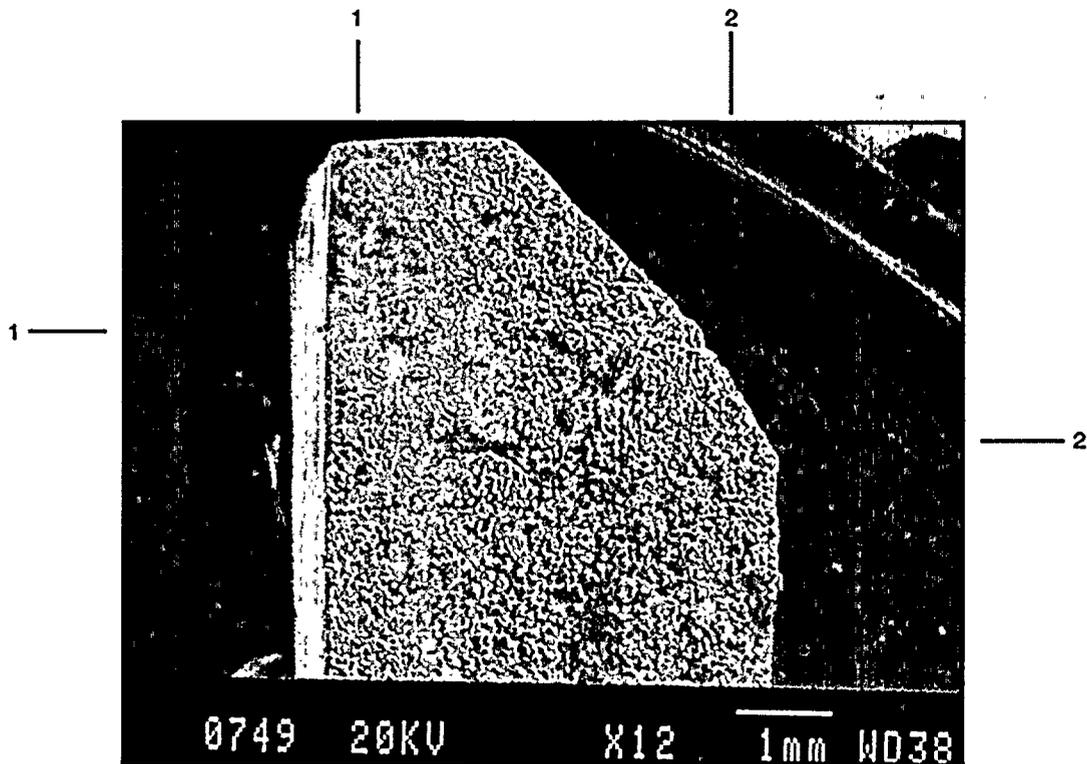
SEM view (12X) of the fracture face of 90 degree contact wedge latch. This low magnification macroscopic view shows secondary cracking associated with the primary fracture. As was found on the 350 degree wedge latch fracture face, this is characteristic of SCC growth. This figure also provides location information for the higher magnification views of the following 90 degree wedge latch fracture figures.
